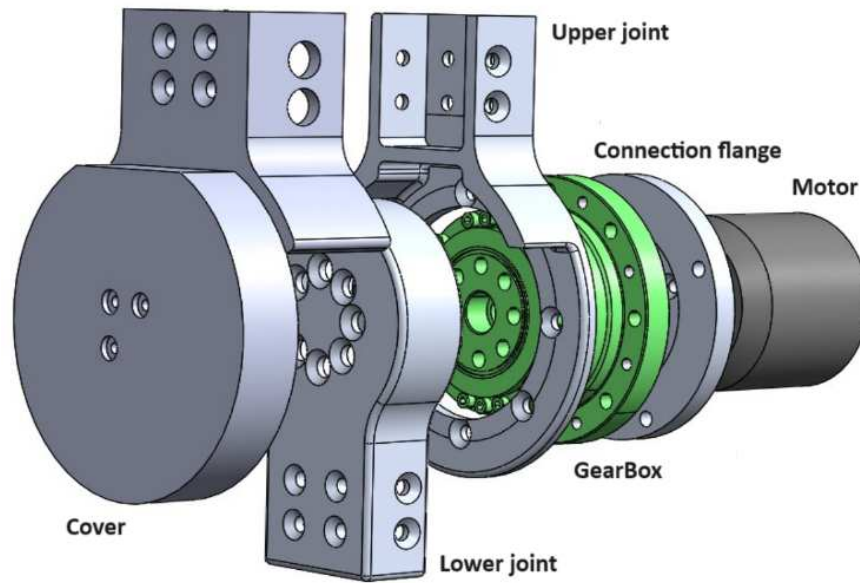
Knee joint on exploded view on 3D CAD software.
